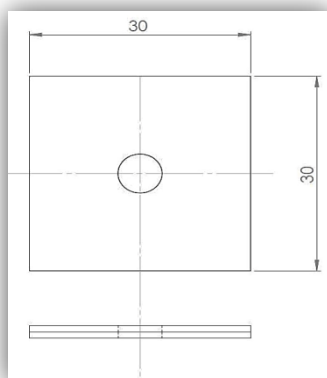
Schematic appearance of the welding samples and weld position
